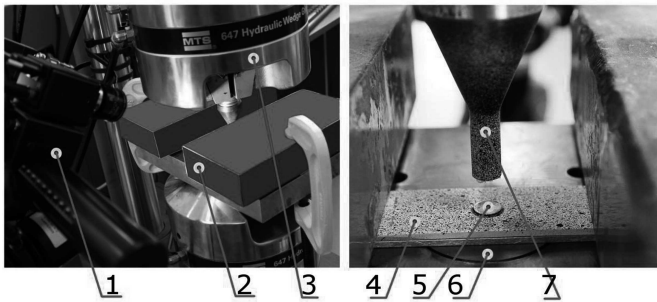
DIC testing stand for piercing monitoring, 1 – DIC sensor, 2 – blankholders, 3 – MTS servohydraulic machine, 4 – top aluminum 2024 strip, 5 – C-SKR rivet, 6 – die, 7 – punch
